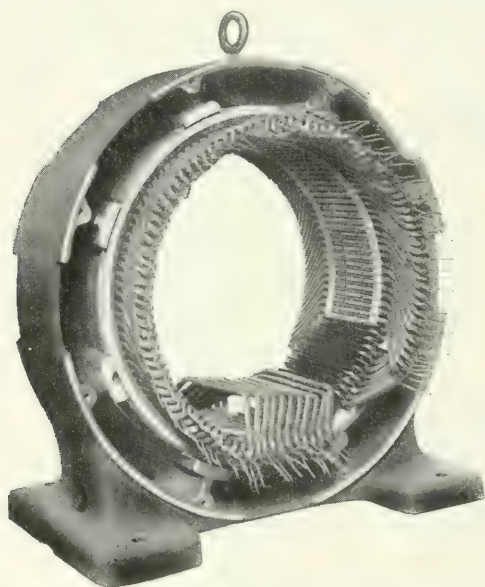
DIAMOND COIL OPEN SLOT STATOR, WITH
